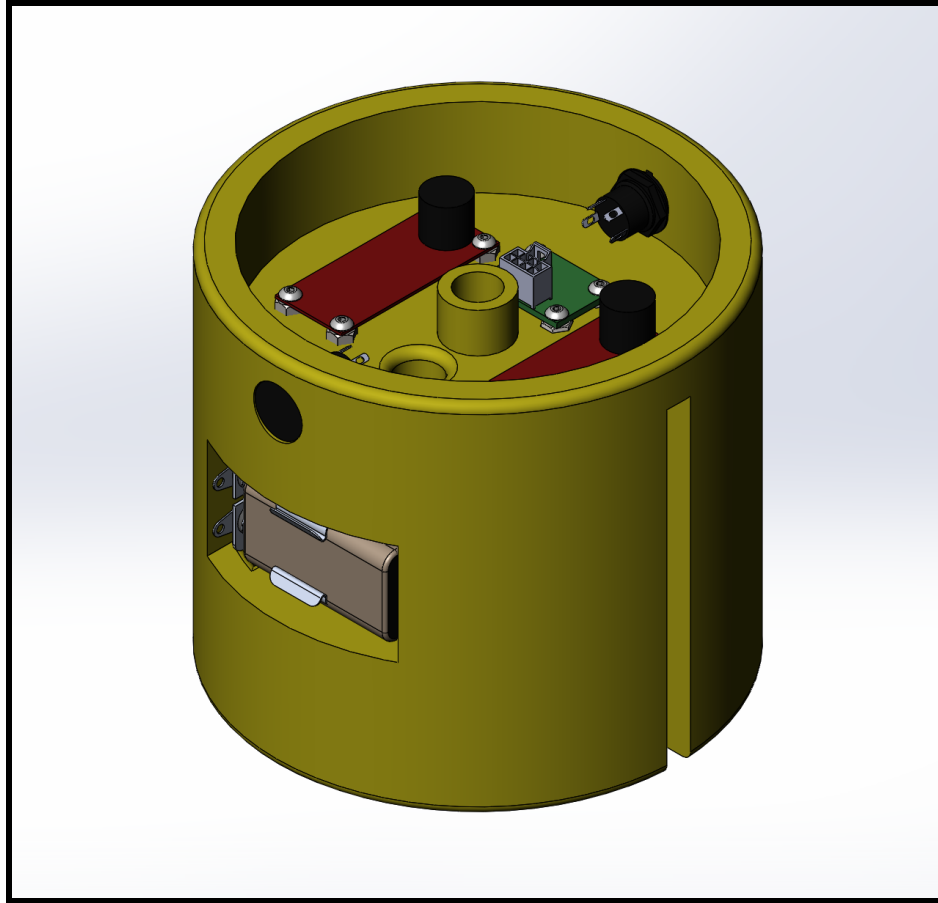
Avionics Section Avionics Assembly Isometric Top View
